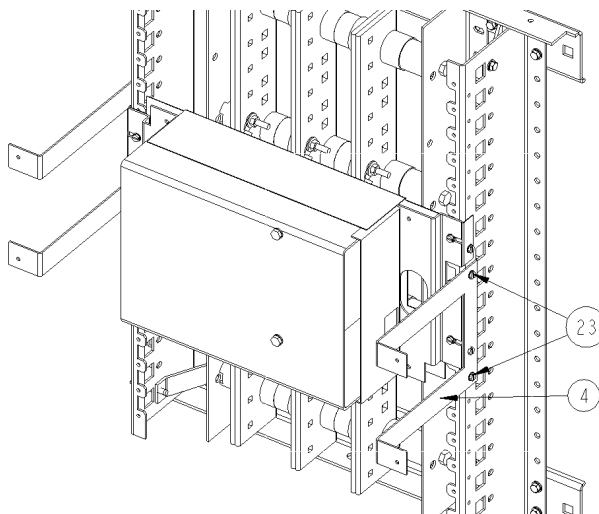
Filler supports for 36, 40, and 44 wide panelboard or 40 and 45 wide switchboard.
